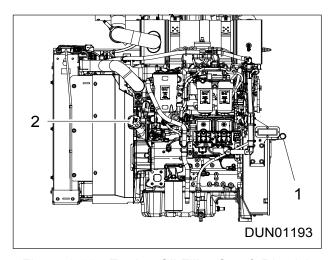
Engine Oil Filler Cap & Dipstick
